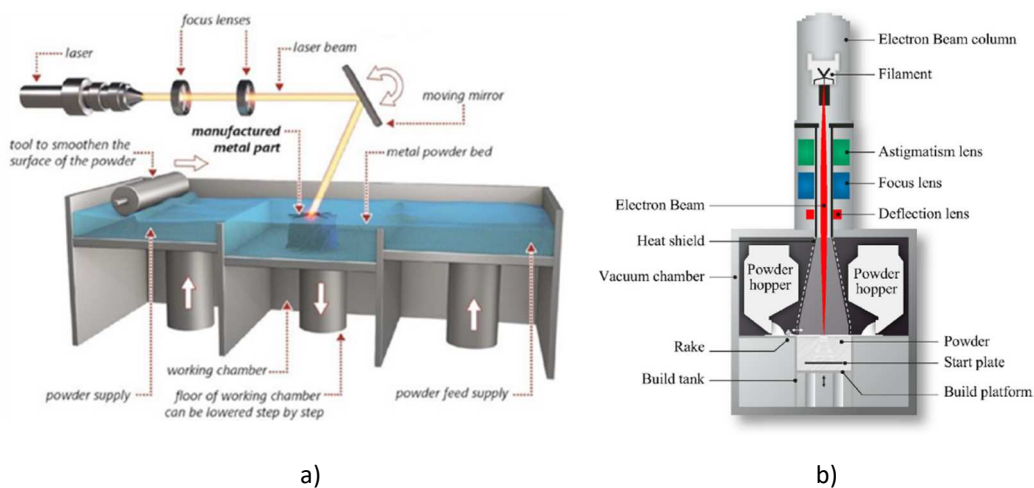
Main components of a) SLM machine, b) EBM machine. Adapted from [20]. Original sources: (a) Empa, (b) Arcam
